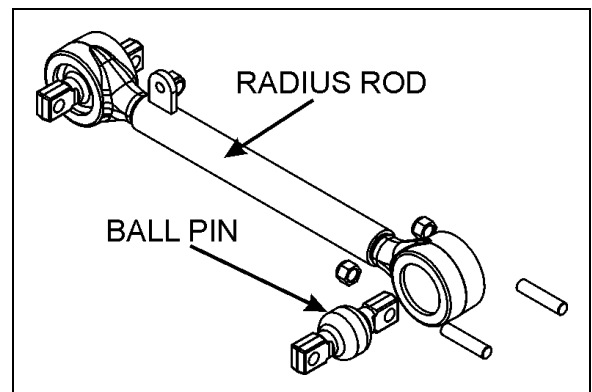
TYPICAL RADIUS ROD SETUP 16010
